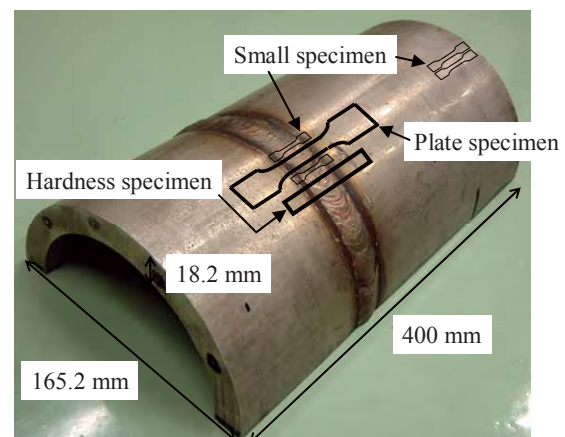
Whole view of butt welded pipe used for the tests.
